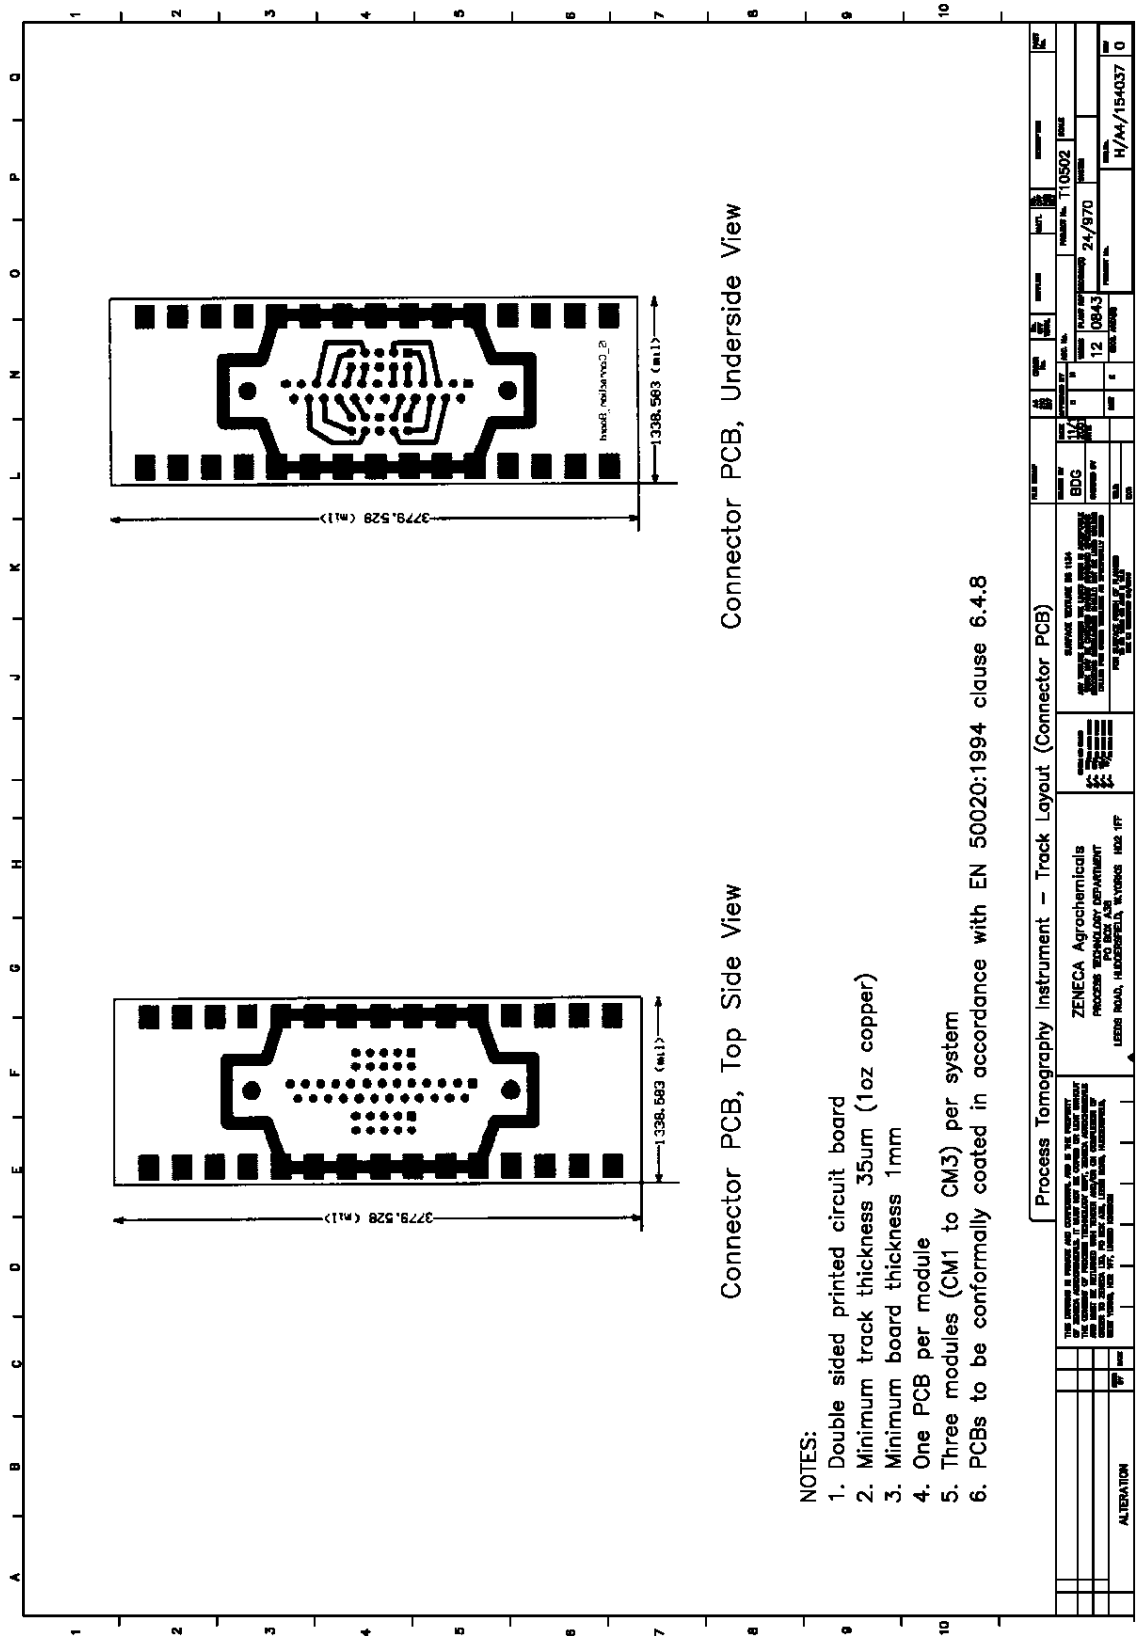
Intrinsically Safe EIT – Connector PCB
